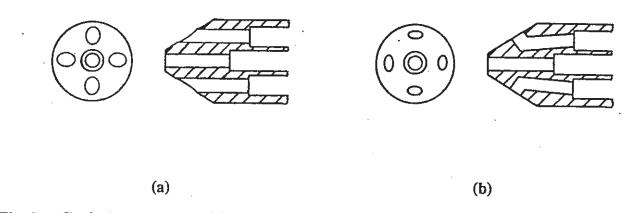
Conical probe types: (a) Forward facing, (b) Perpendicular.
